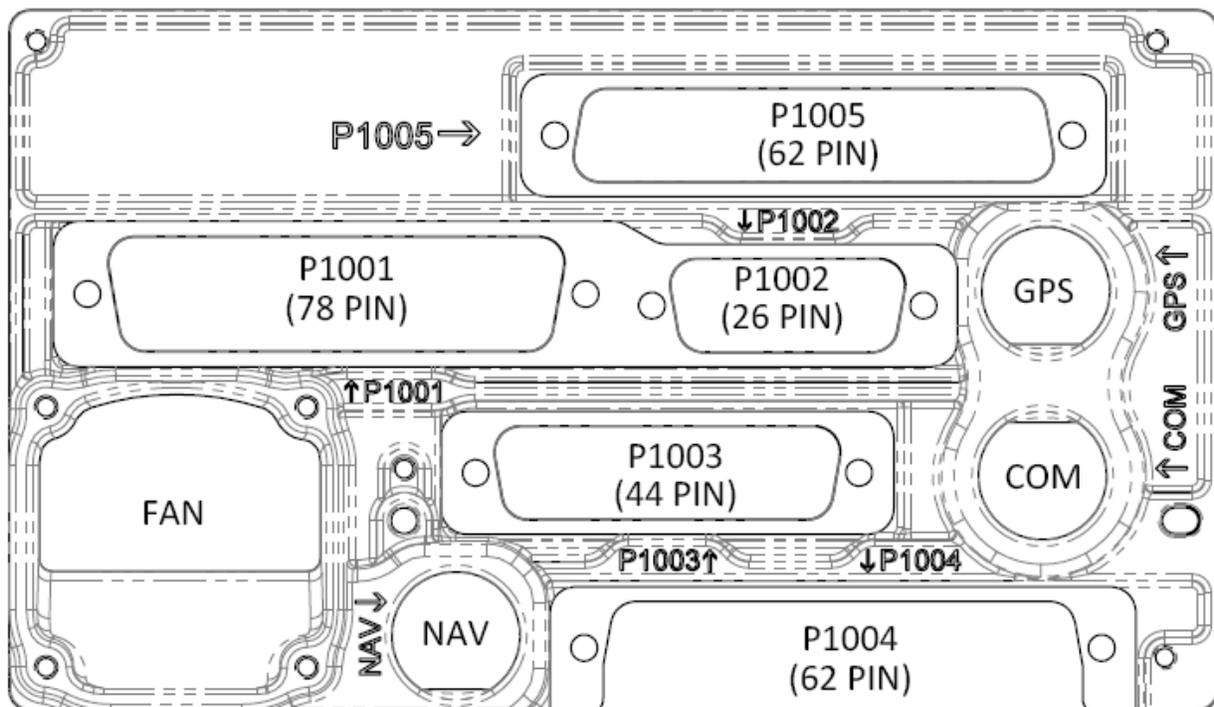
GTN 7XX Connector Layout Detail—Rear View
